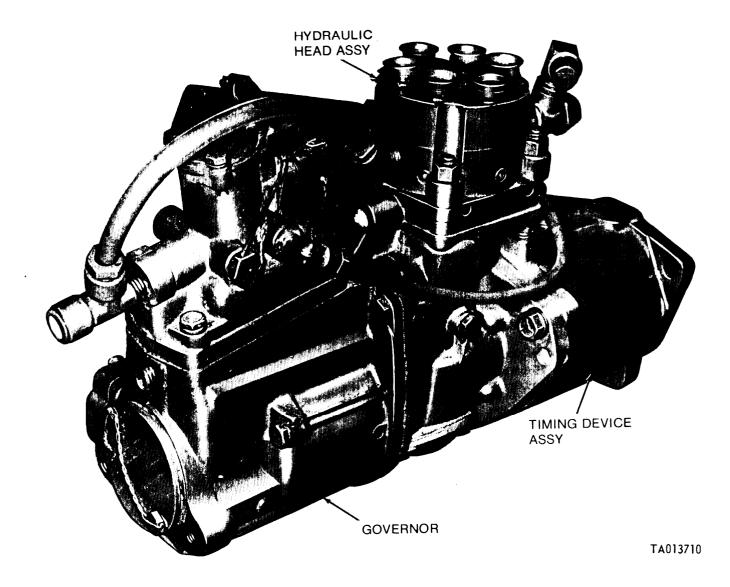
Metering and distributing fuel injection pump assembly (code A), right rear view.
